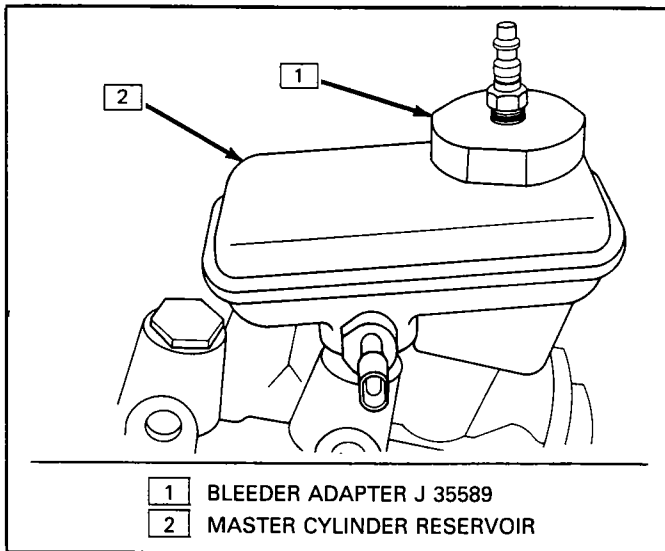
Compact Master Cylinder Pressure Bleeding Adapter
